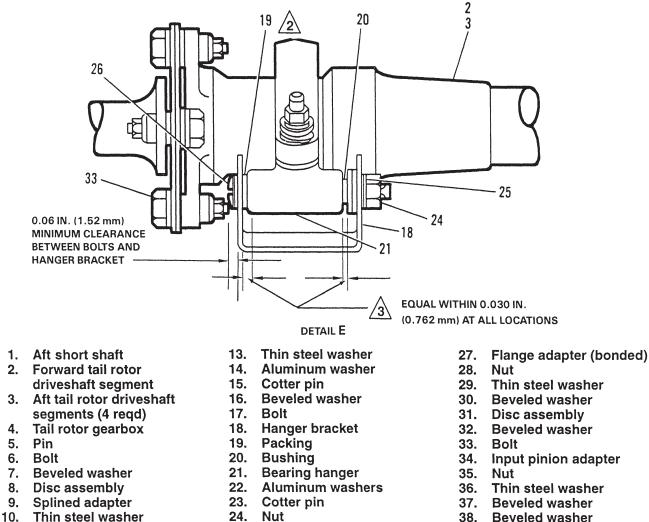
Segmented tail rotor driveshafts (Sheet 1 of 2)
